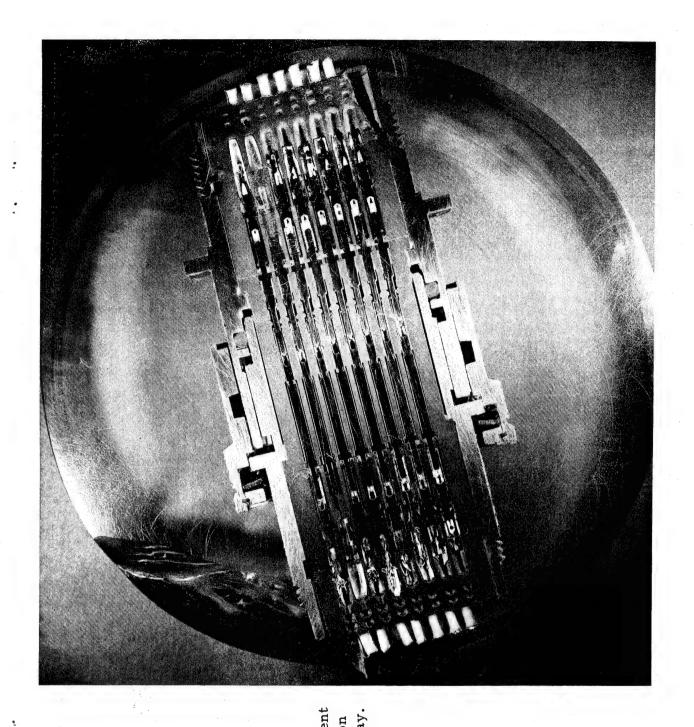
18-85 Arrangement Metallic Retention Assembly Cutaway.
